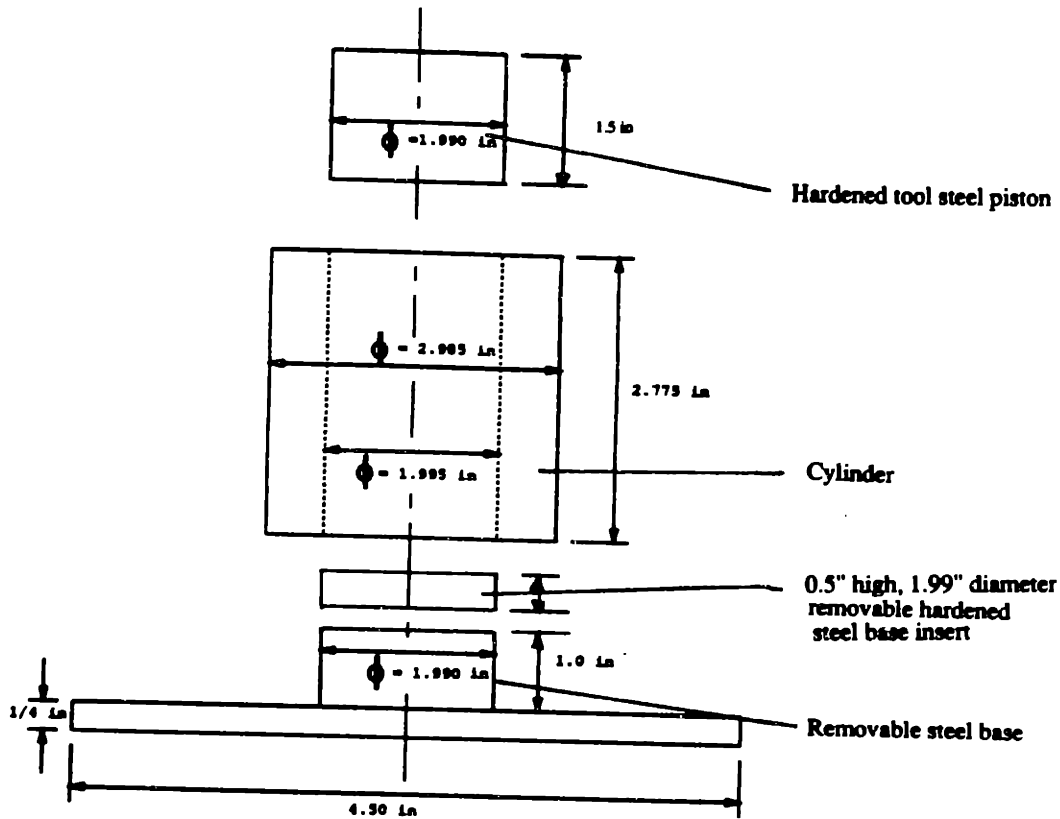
Dimensioned sketch of the Cylinder-piston apparatus for particle bed test [from Ghaddar 91]
